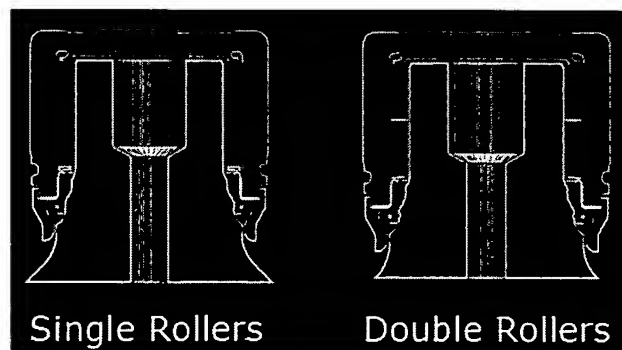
Fig. B: Universal joint trunnion bearing with single or double row rollers.
